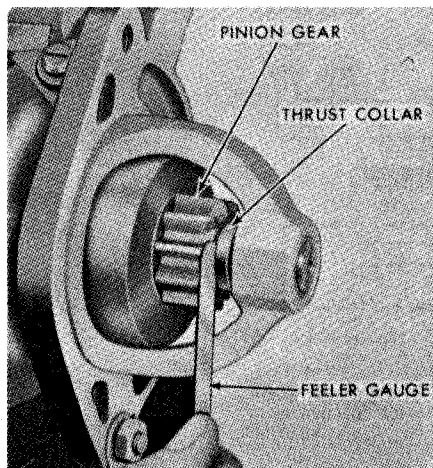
Measuring starting motor drive pinion clearance. Refer to text for procedure and to Fig. 134 for adjustment of clearance.
